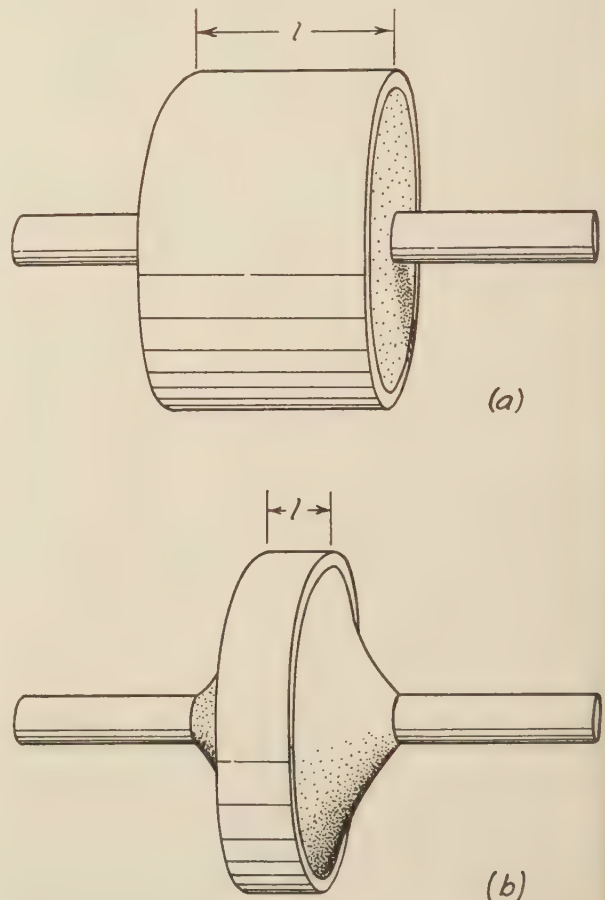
SHEAR SPRINGS; (a) CYLINDRICAL FORM, NONUNIFORM STRESS, (b) SPECIAL FORM FOR UNIFORM STRESS
